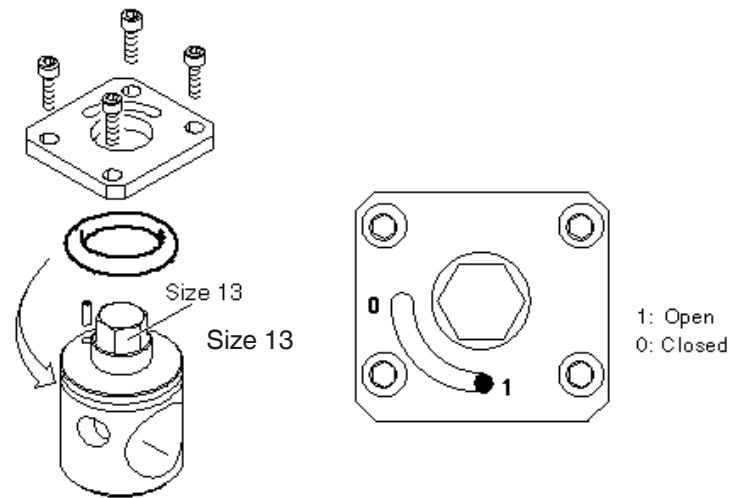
Tank isolation valve; left: exploded view, right: top view
